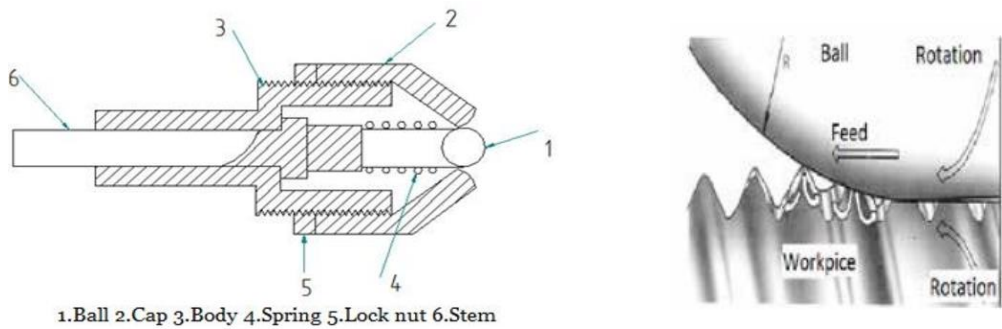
Design and Manufacturing of Multi-Ball Burnishing Tool [6,8,14]
